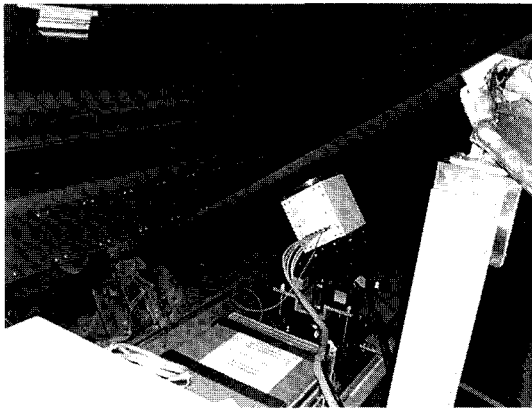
Sensor head on a manufacturing machine in our mill.
